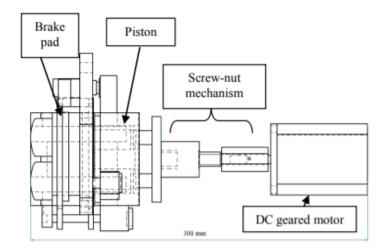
Scheme of the brake-by-wire actuator. Adopted from [MK14].
